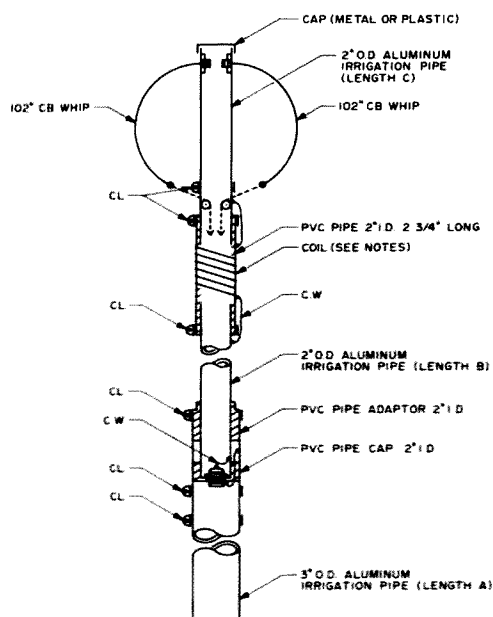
Antenna construction details. Notes: C.W. — connecting wire to solder lugs; CL. — radiator hose clamp; Coil — Polycoil 2½" diameter #16, 10 turns per inch.
